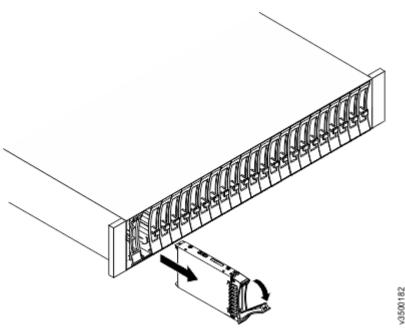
Unlocking and removing a 2.5-inch drive from its slot
